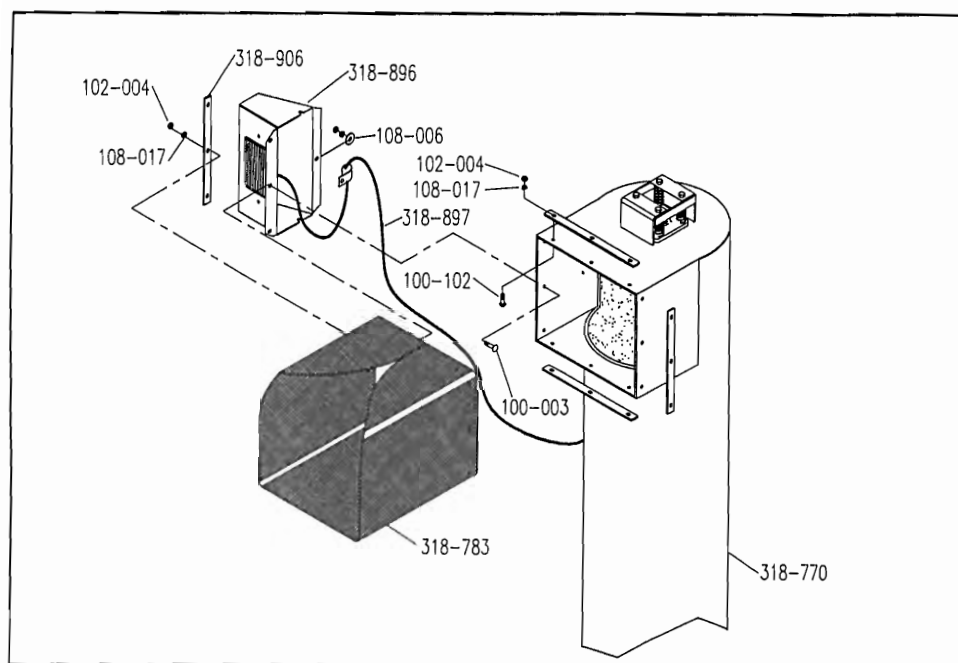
ASSEMBLY OF RUBBER BOOT AND HALOGEN LAMP TO DIRECTIONAL SPOUT ON TOP AUGER
